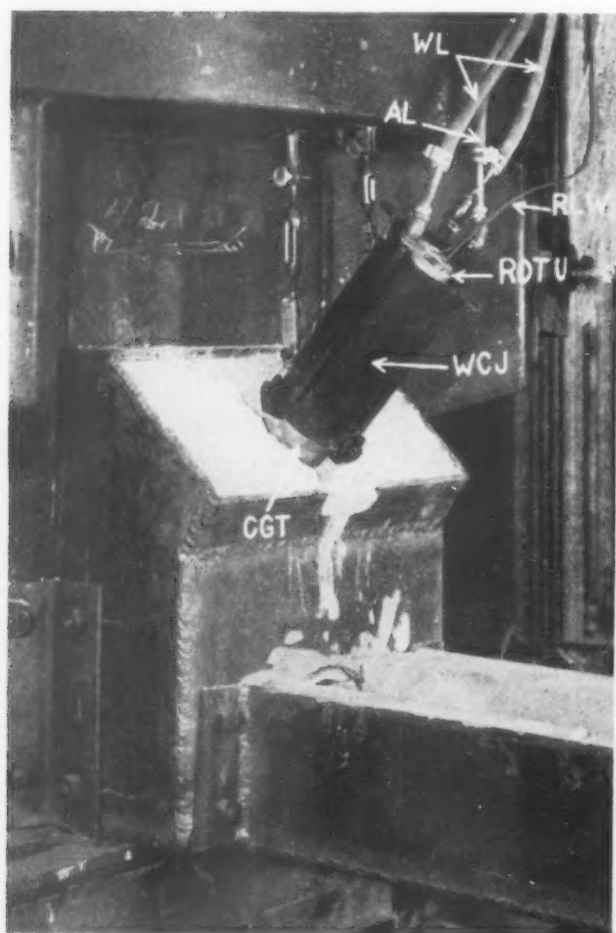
RAYOTUBE IN OPENING POSITION: CGT-CLAY-GRAPHITE TUBE; WCJ-WATER COOLED JACKET; ROTU-RAYOTUBE UNIT; WL-WATER LINES; AL-AIR LINES; RLW-RECORDER LEAD WIRE.
